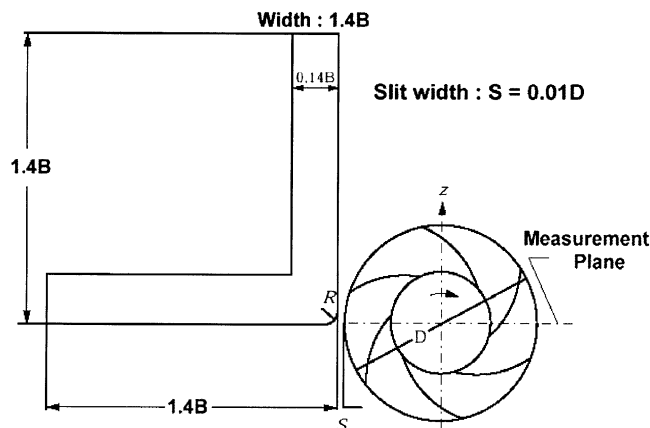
Dimensions of the impeller and wedge used by Weidemann.
